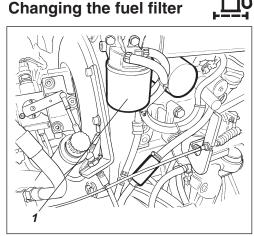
Engine compartment CC102/122/C 1. Fuel filter
